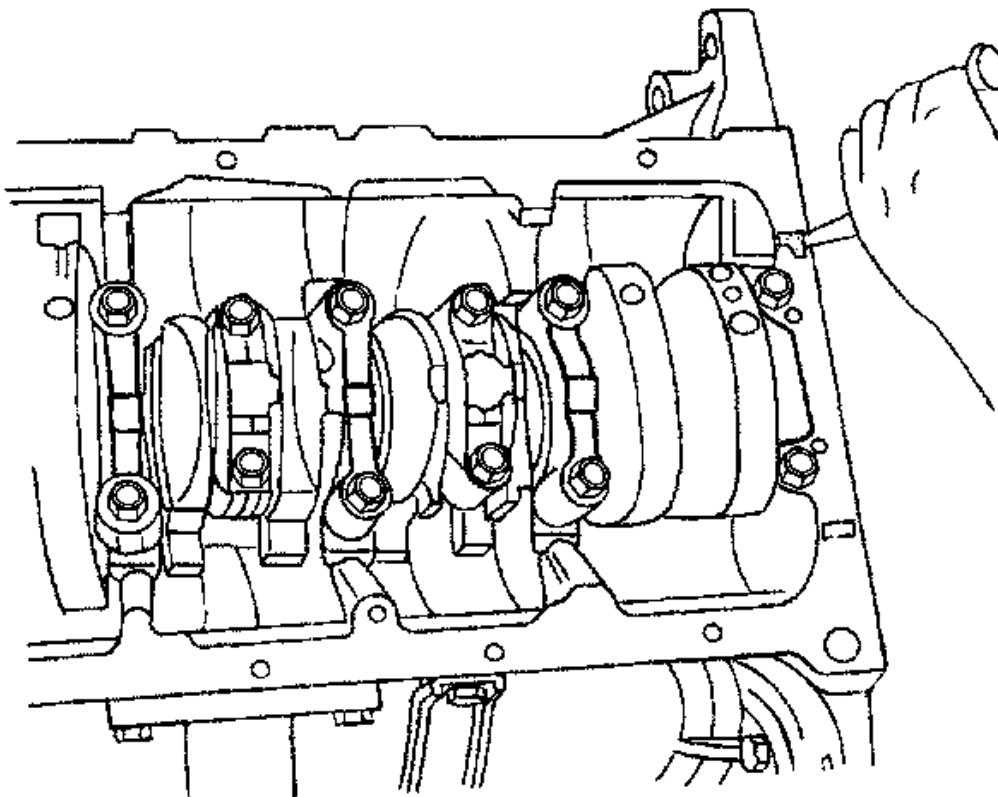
Cleaning Gasket Remnants From Mating Surface
